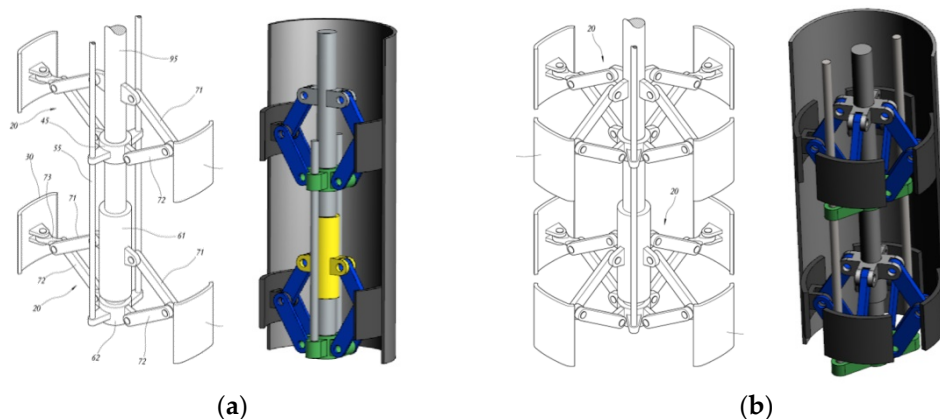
Design concept of mechanical expansion equipment for expanding steel pipe according to operation method of blades: (a) Two-way type of mechanical expansion equipment; (b) Four-way type of mechanical expansion equipment.
